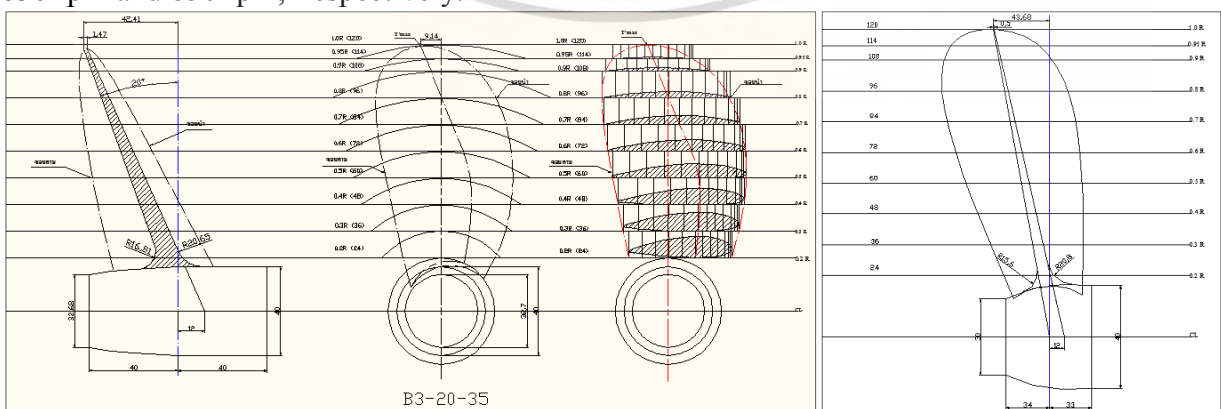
Drawing Type 3 Blades Angle 20 Degree Developed Area 35(New Design)
